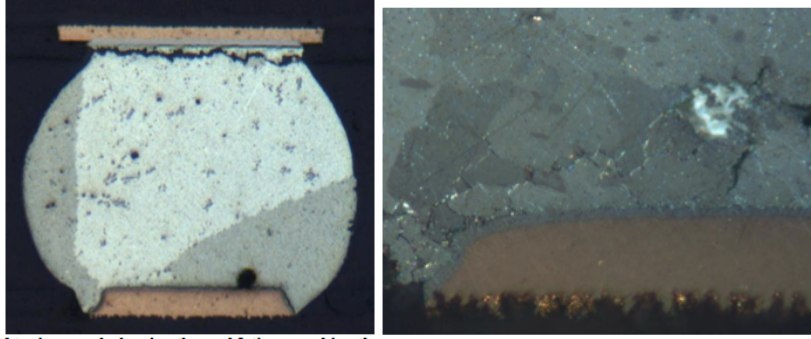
Full solder crack (left) and crack initiation (right) [10]
